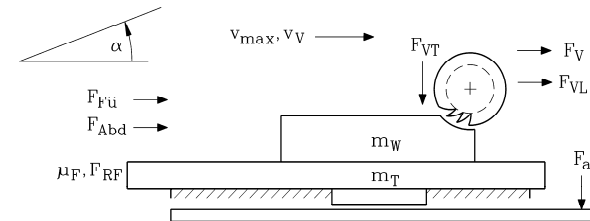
A linear PM servo motor moves a working table for milling process
